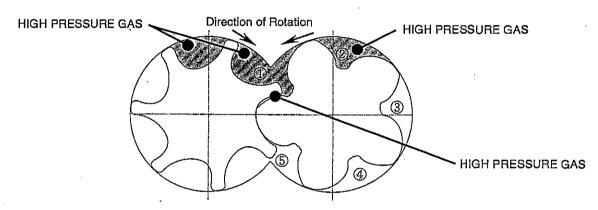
Rotor profile of KOBELCO COMPRESSOR
